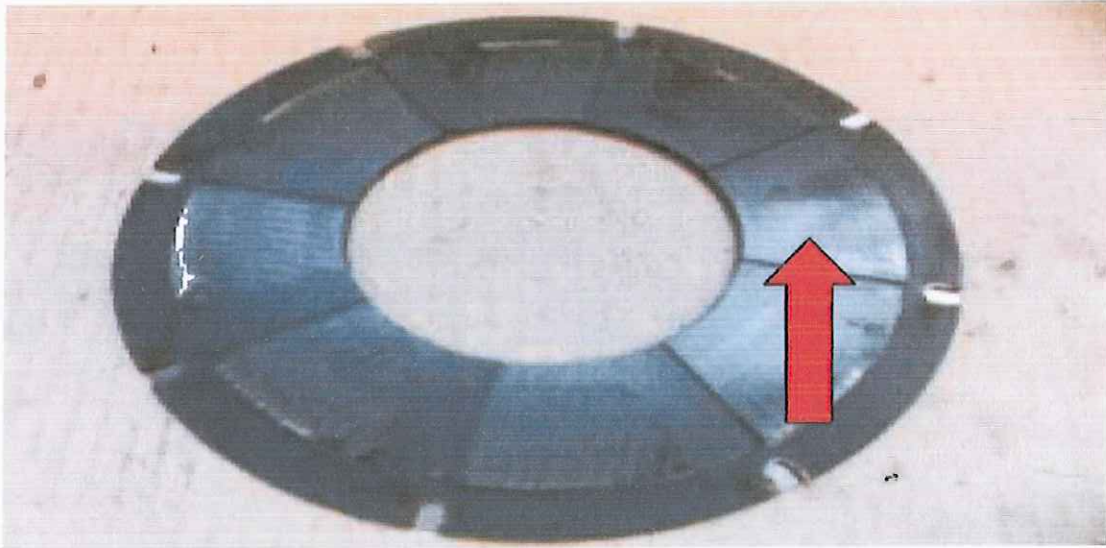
Thrust bearing X115 with clear wear marks on air foils.
